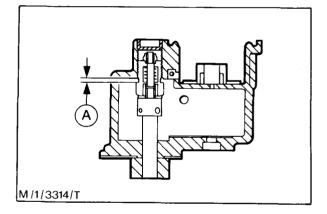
Maximum Fuel Screw Correctly Installed A. 0,5mm (0,021in)
